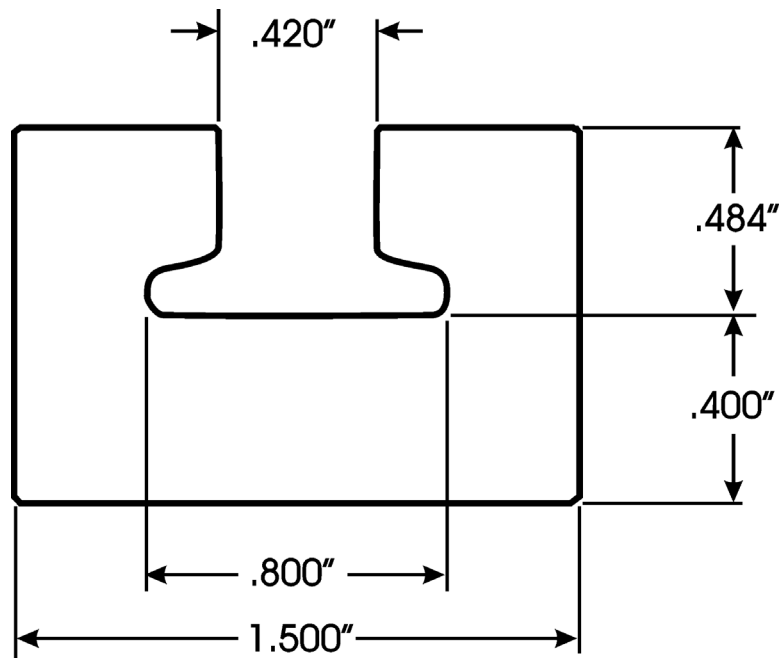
Type "M" Track, Steel Foundation Track Ordinary Strength Steel
